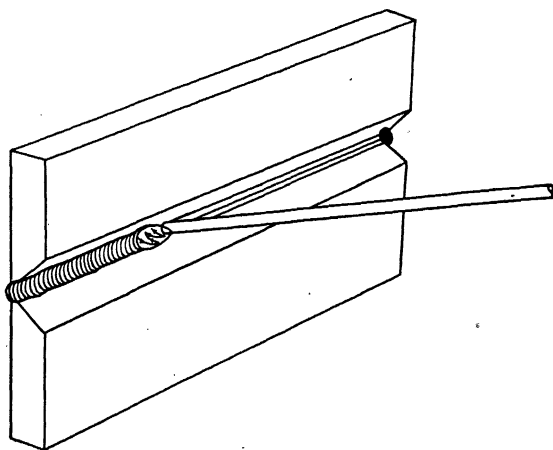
Horizontal butt weld. Arrows indicate direction of electrode movement.
